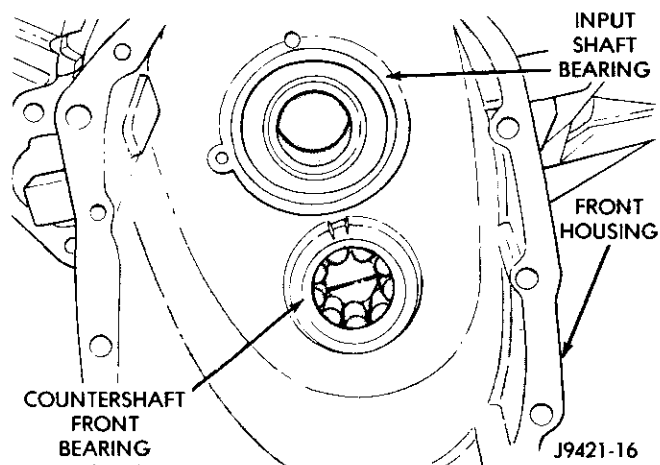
Input Shaft And Countershaft Front Bearing Location
